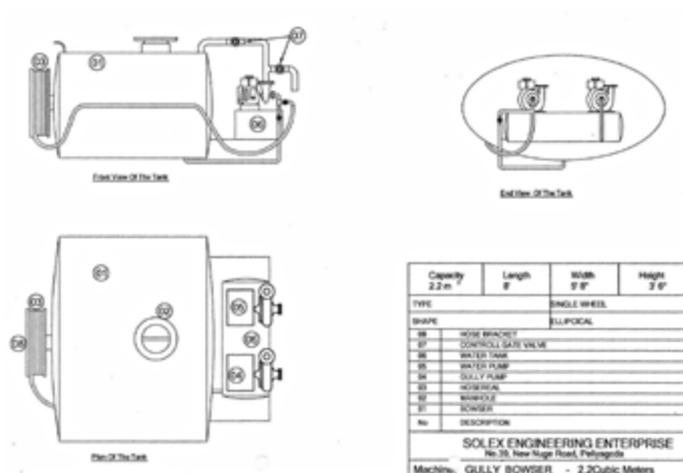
Front, top and end view of the Sri Lankan tractor-drawn trailer-mounted vacuum tanker © UNICEF Sri Lanka
